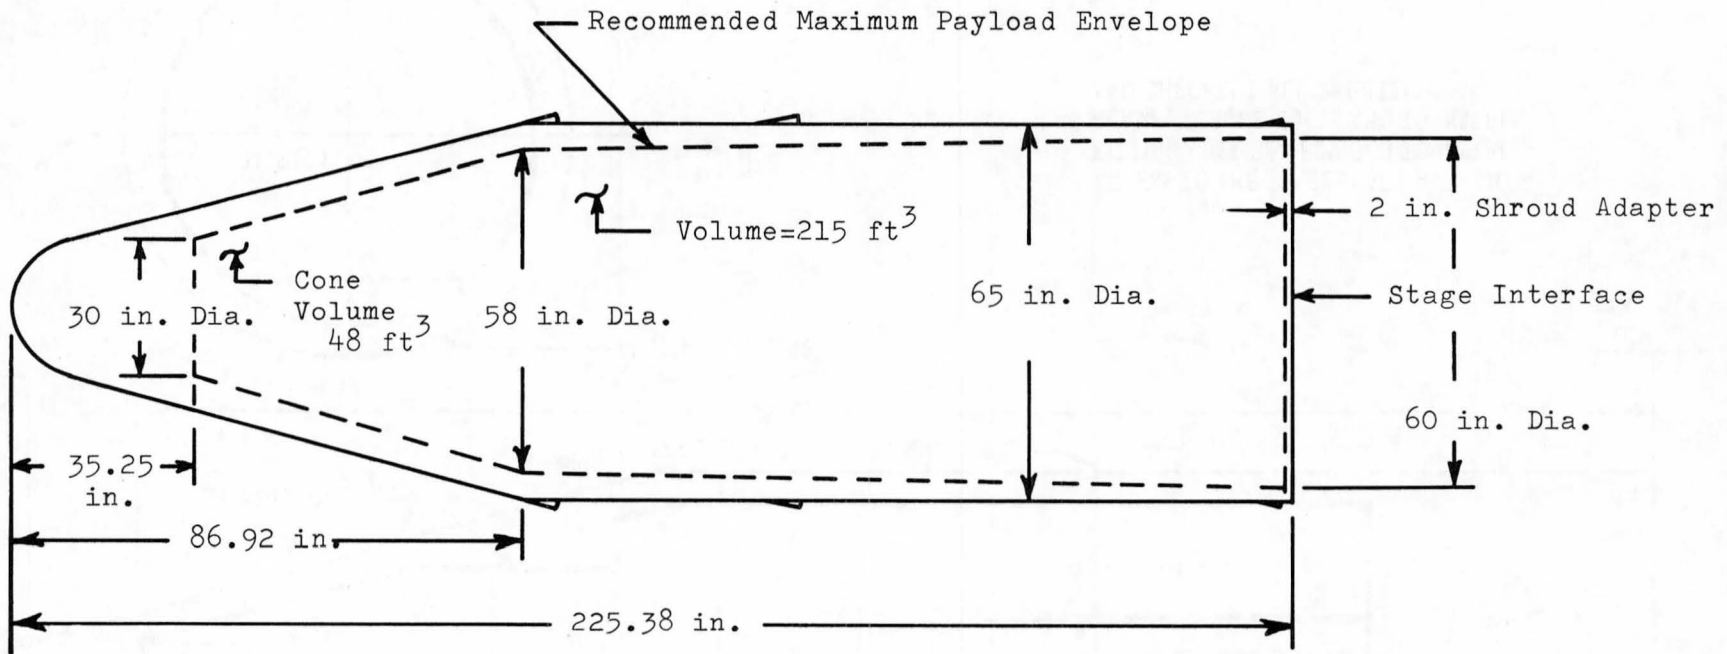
STANDARD AGENA CLAMSHELL SHROUD
